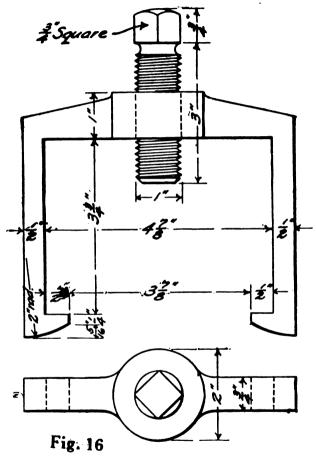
shows a very convenient tool for separating the brake valve body from the valve seat.
